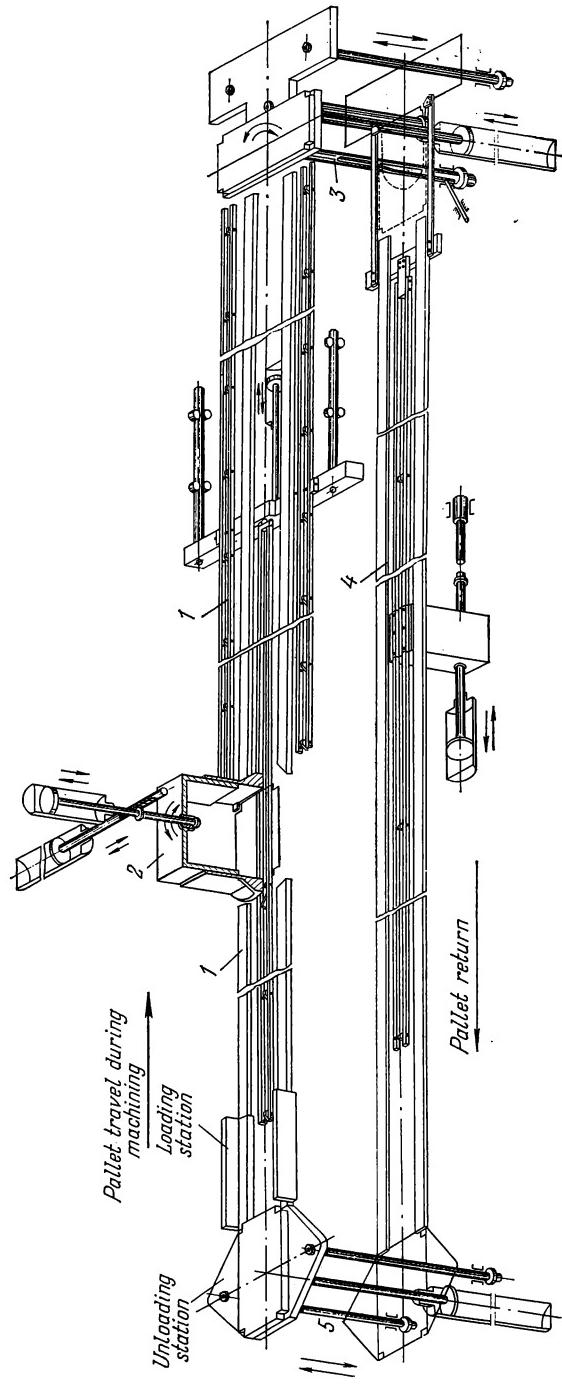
Handling system of a palletized transfer machine for machining globe valve bodies
